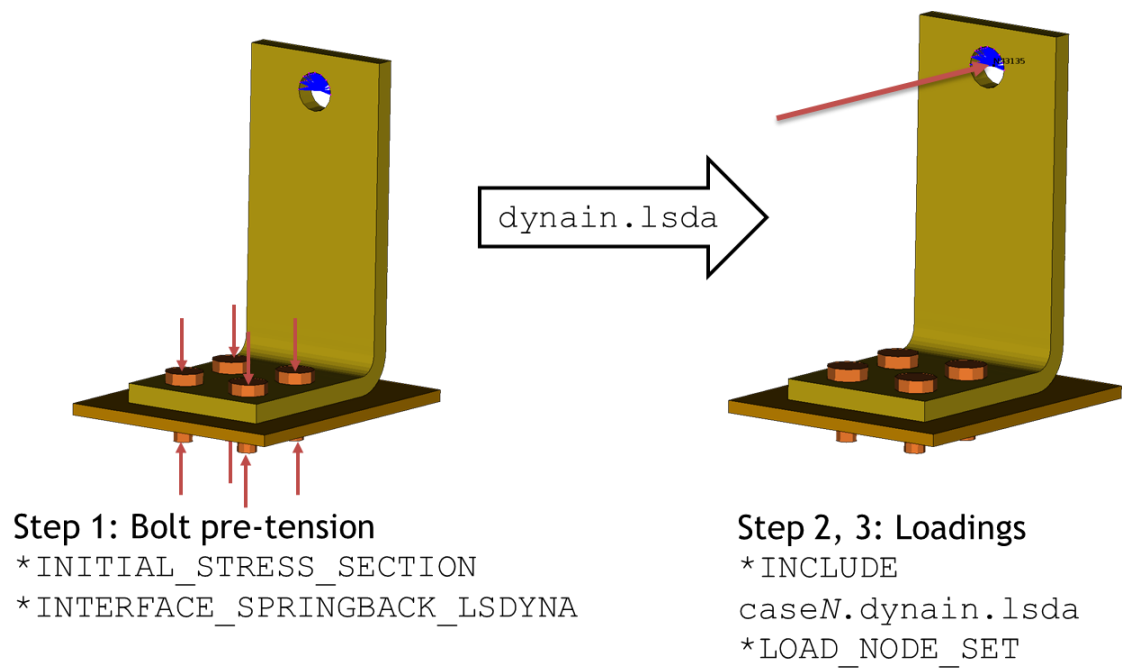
The L-bracket assembly is subjected to a sequence of loadings.
